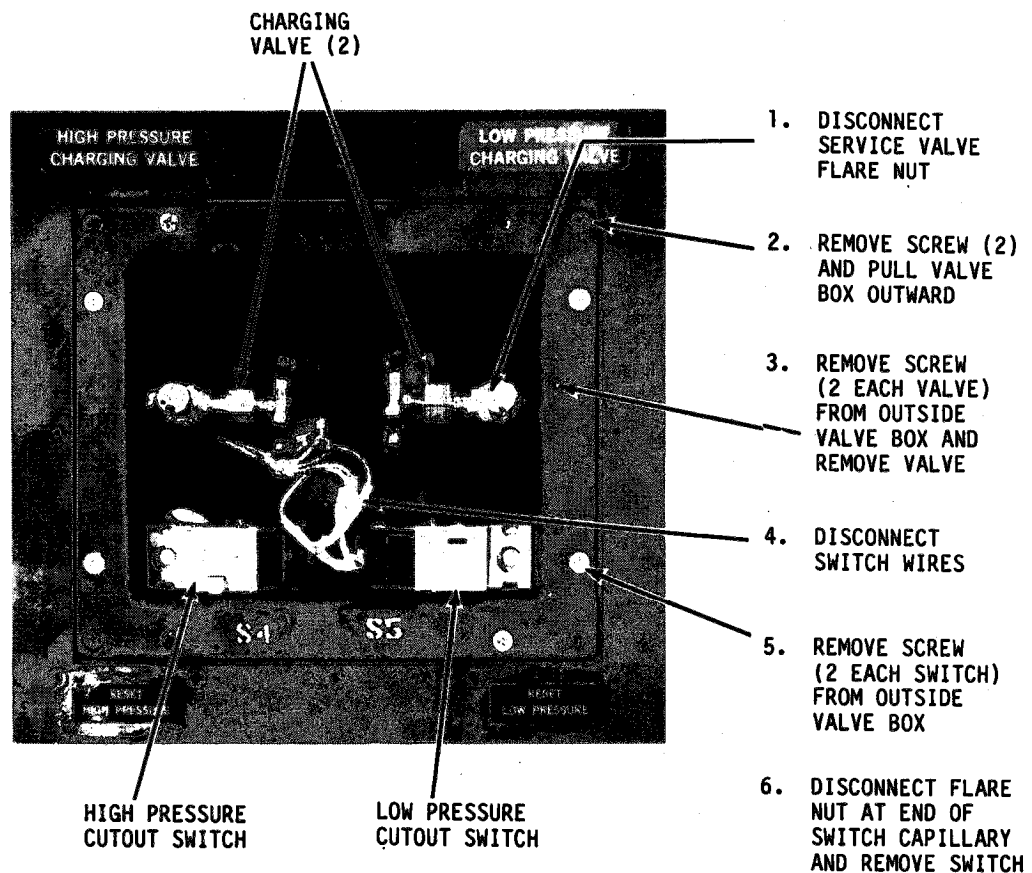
Service valves, high and low pressure cutout switches, removal and installation
